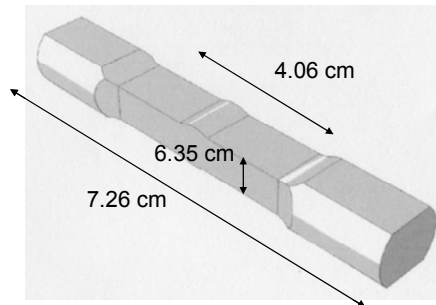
View of welded SHPB tensile specimen for Al 5083 prior to threading of the grip ends.
